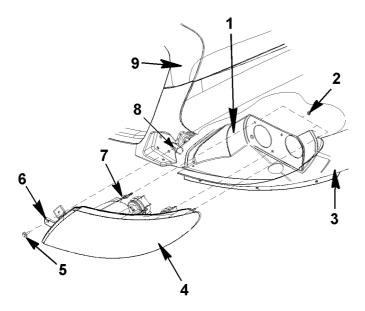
Headlight Assembly Remove and Install (Driver Side Shown)
